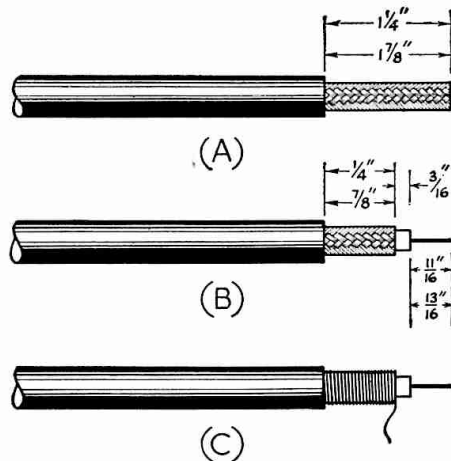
Cable-stripping dimensions for Jones Type P-101 plugs. Smaller dimensions are for 1/4-inch plugs, the larger dimensions for 1/2-inch plugs. As indicated in C, the remaining copper braid is wound with bare or tinned wire and then tinned, to make a snug fit in the sleeve of the plug. Hold a hot iron to the sleeve after the cable is inserted to solder the sleeve to the braid.
